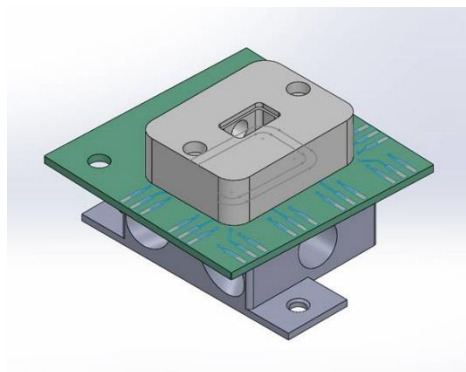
Representation of the vacuum sealing device put on the PCB. An upper and lower part are needed for the device to work.
